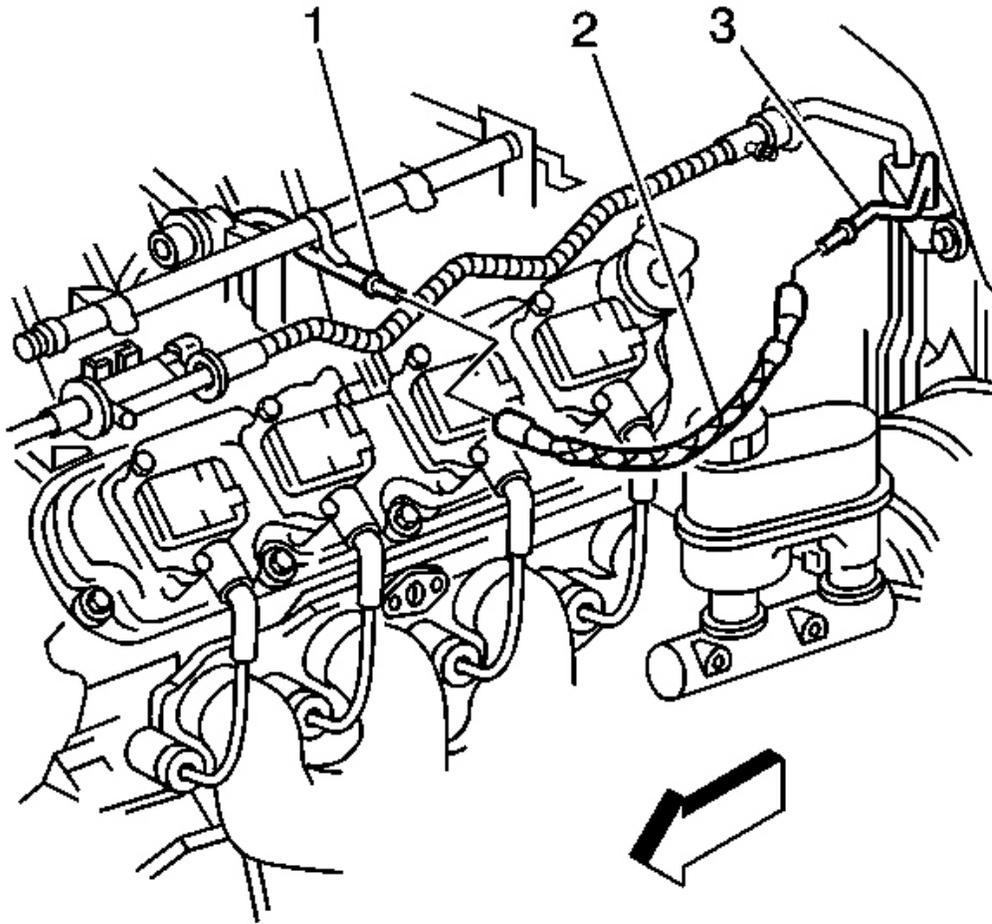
EVAP Pipe Retainer & Chassis Fuel
